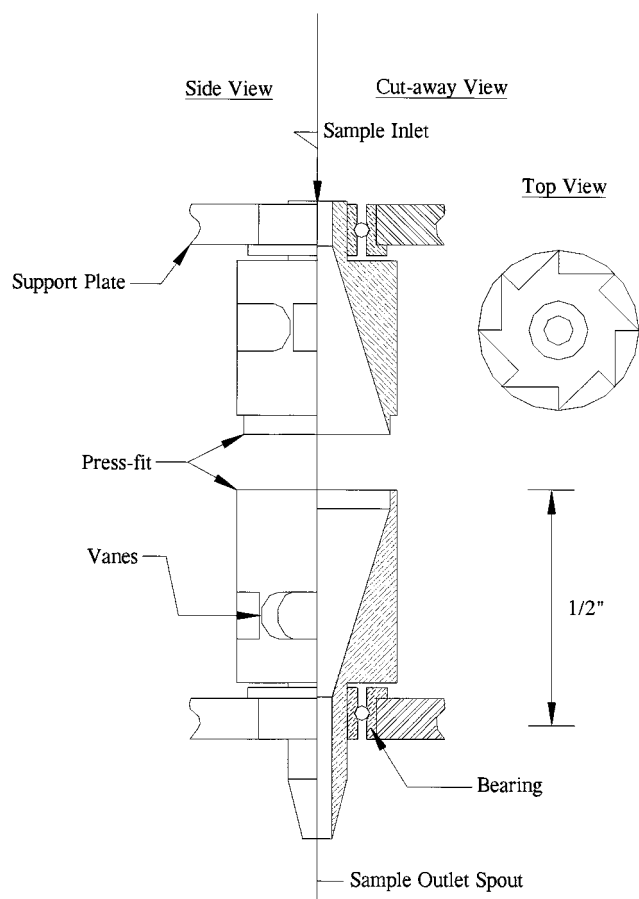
Cutaway drawing of a rotor showing bearings and inner V profile.
